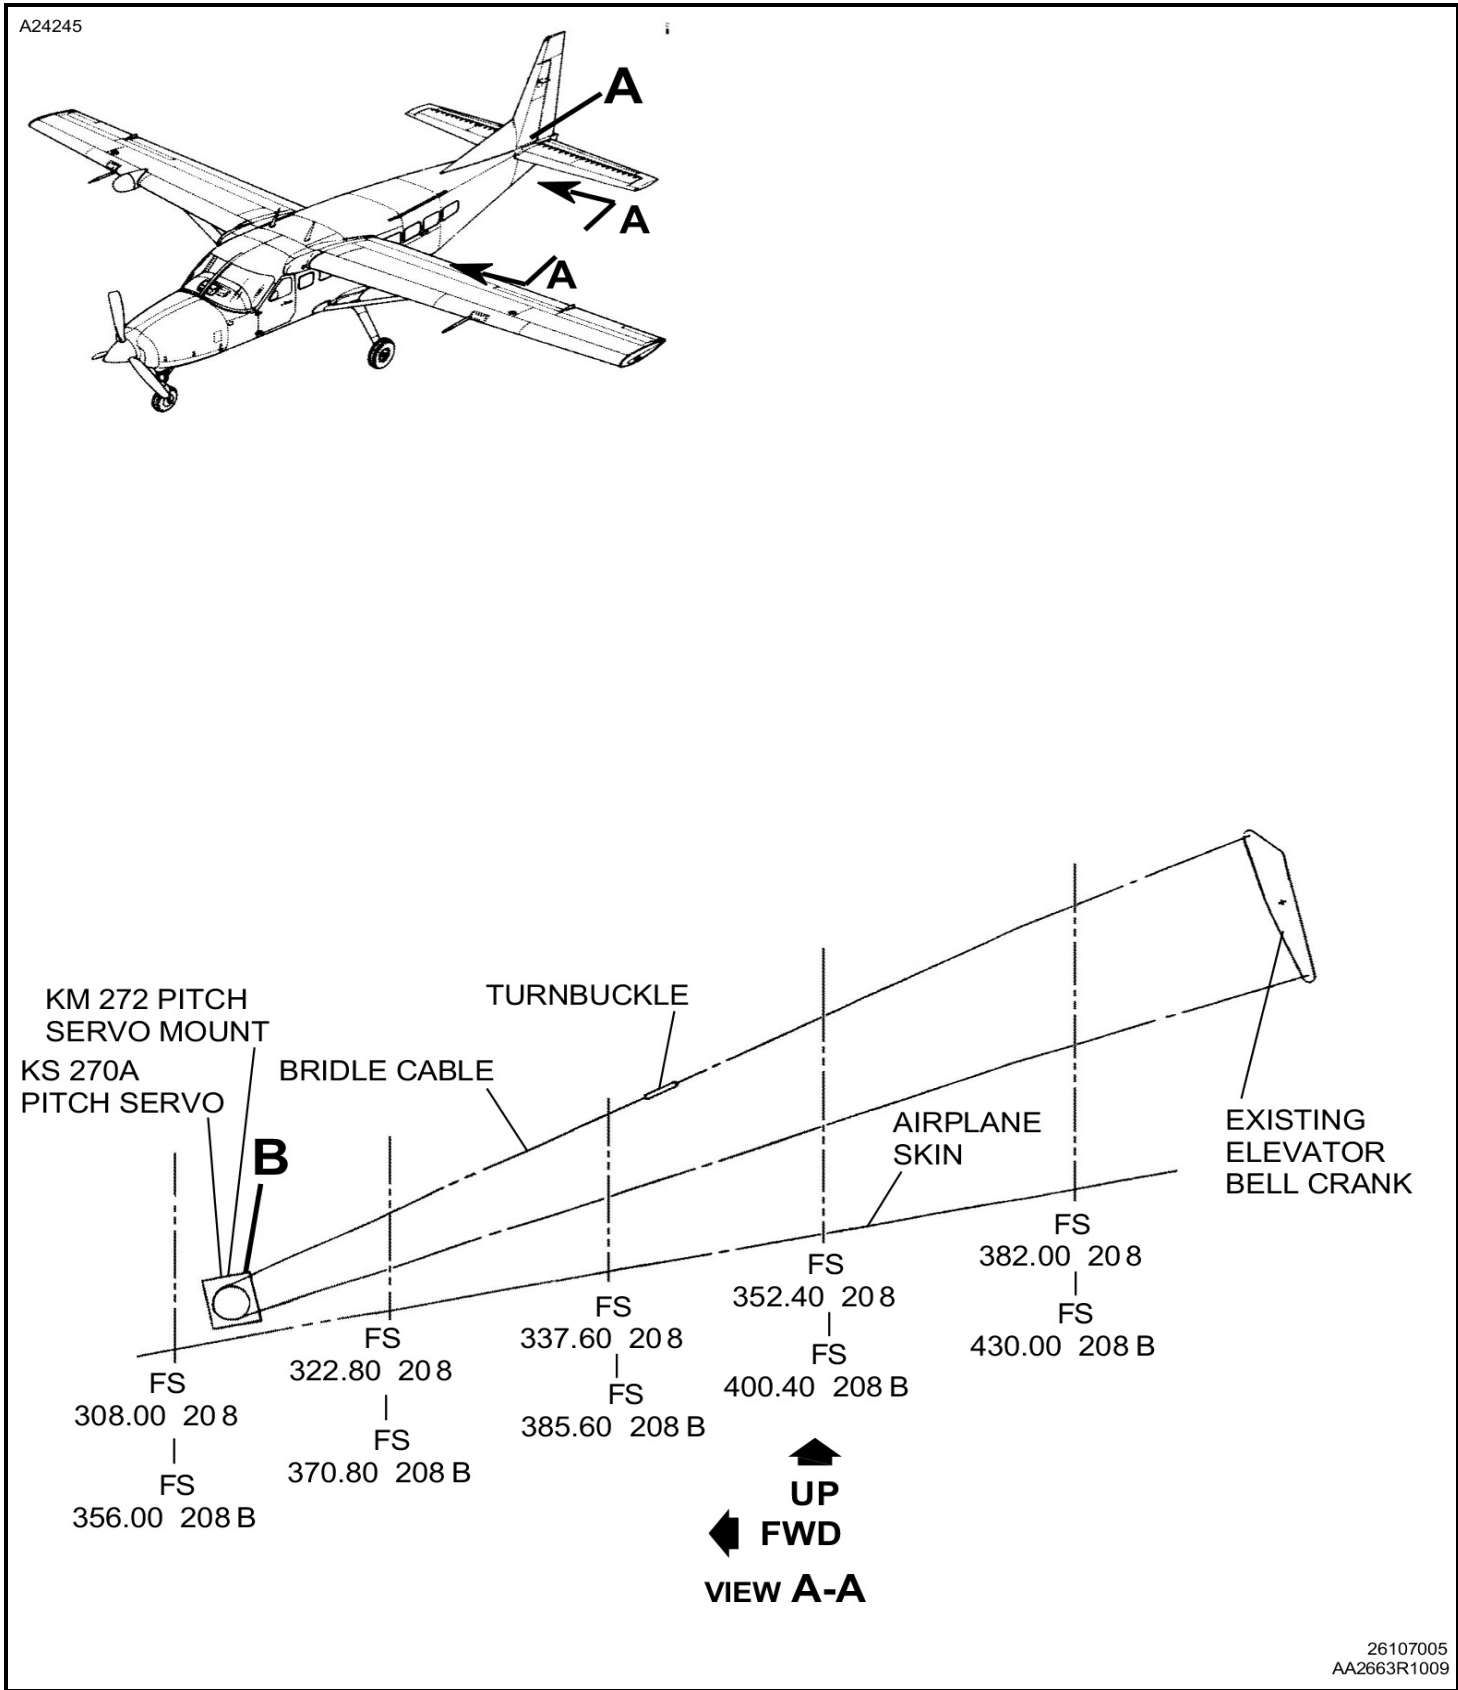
Sheet 3 : Clutch Torque Adjustment
